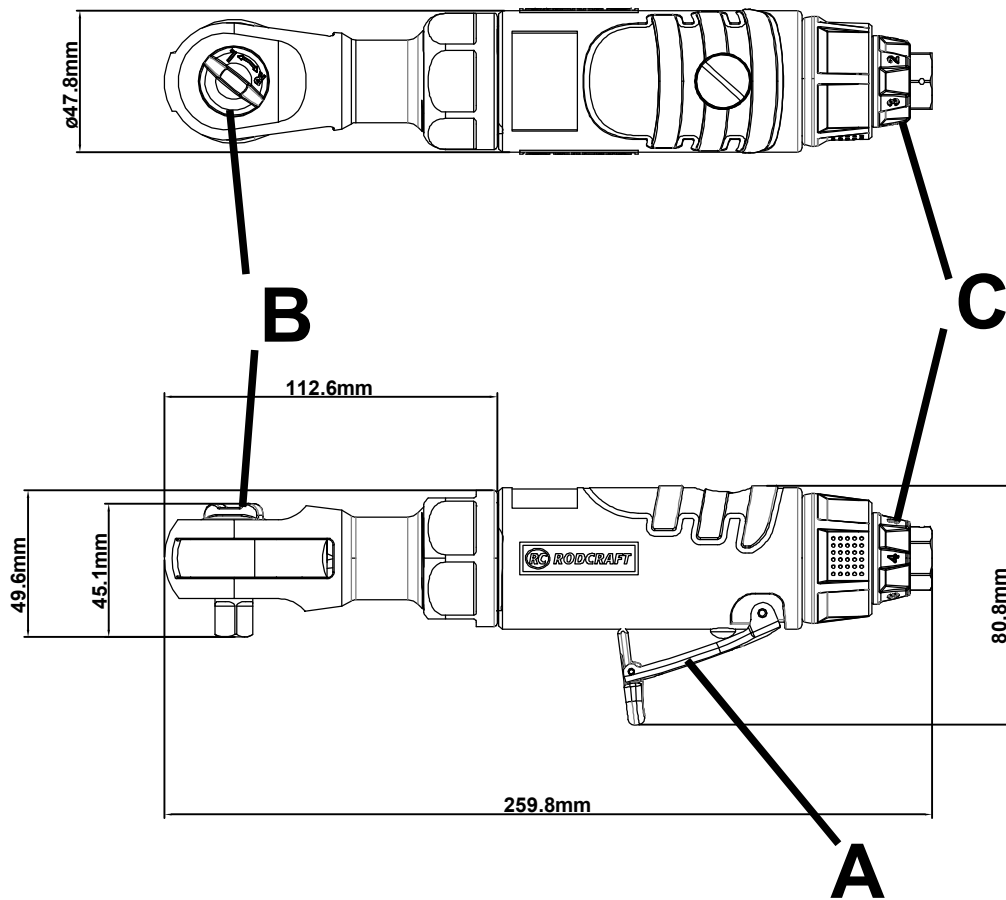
RC3278 & RC3678 DIMENSIONS
